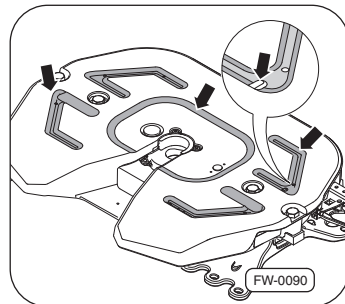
· Wear check of fifth wheel plates SK-S 36.20; SK-S 36.20 D
